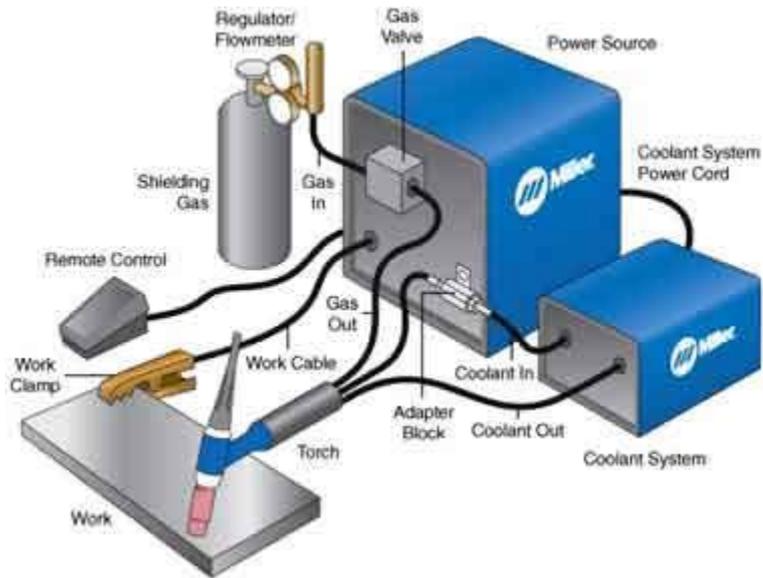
Gas welding typical set up (Miller Welding, 2015)
